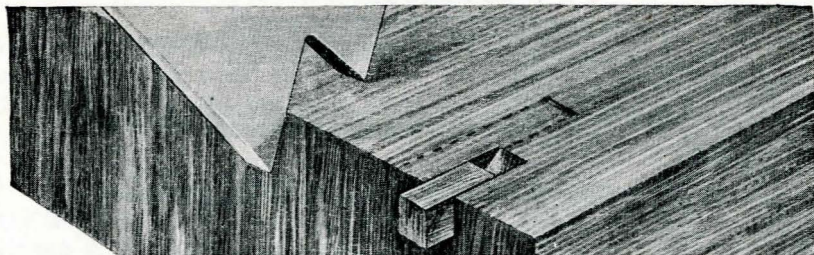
ENLARGED VIEW SHOWING THE ACTION OF RIPS AW TEETH
